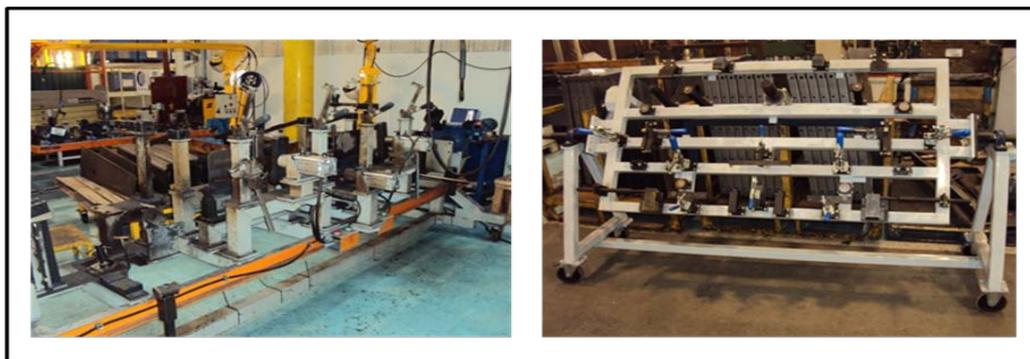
Welding Machines and Welding/Assembly Devices; Source: Archives from the company being studied
